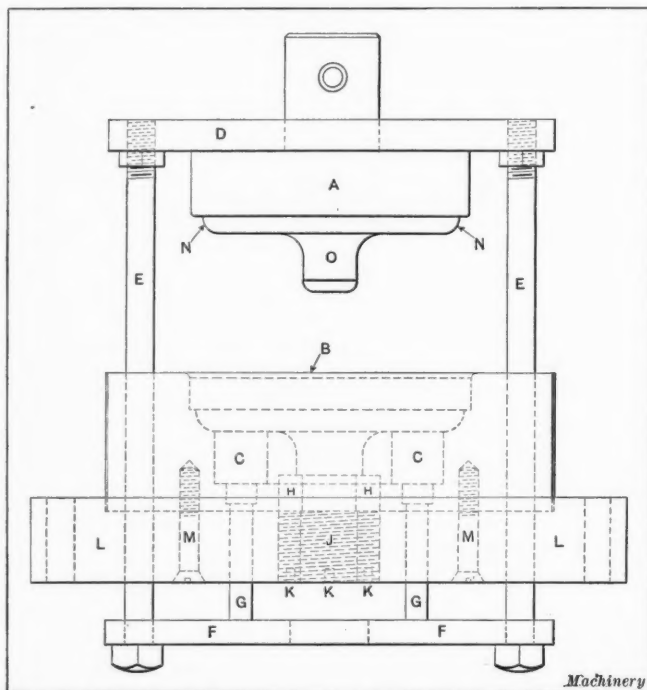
Drawing and Piercing Die in which Final Operation is performed
